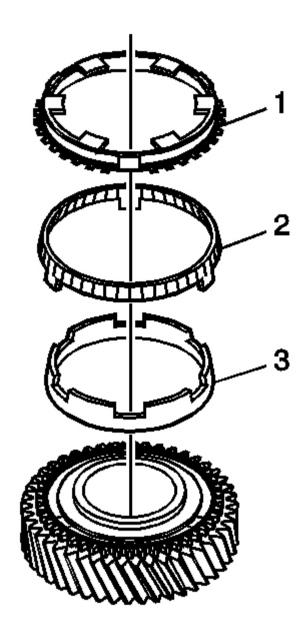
2nd Gear Inner/Outer Cone & Blocking Ring Courtesy of GENERAL MOTORS CORP.
